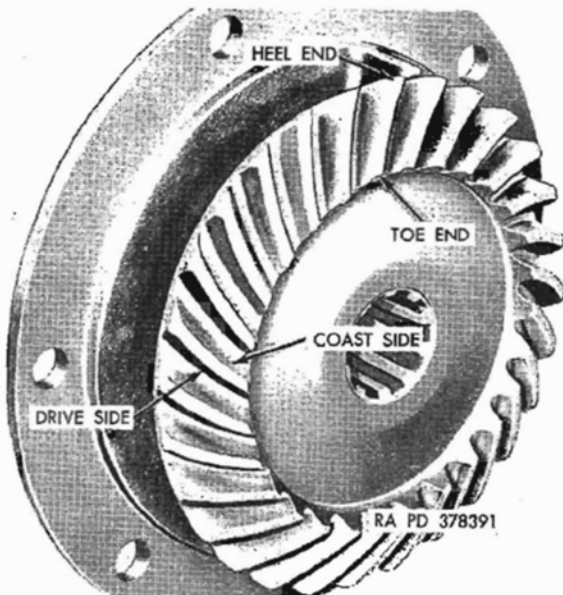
Drive gear for front axle assembled in gear bearing cage, with nomenclature for gear teeth.
